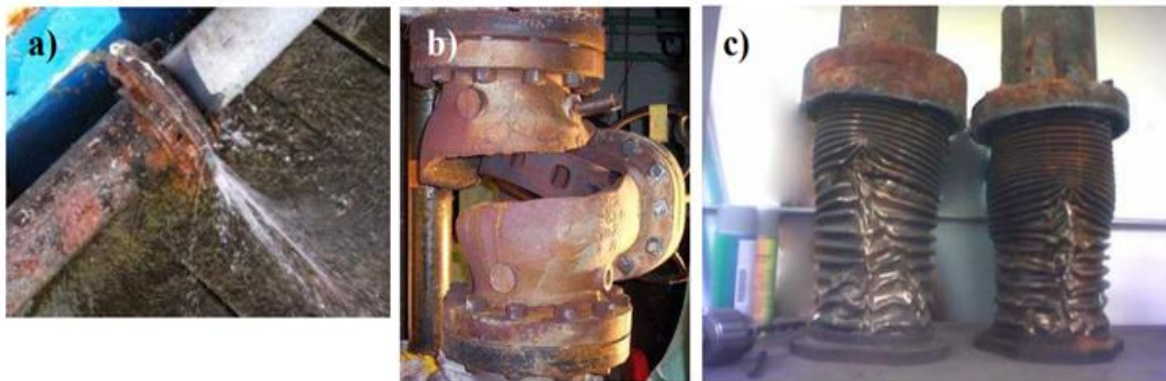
Effects of a water hammer: a) failure of a seal, b) destruction of the valve casing, c) collapsing of expansion joints [18]
